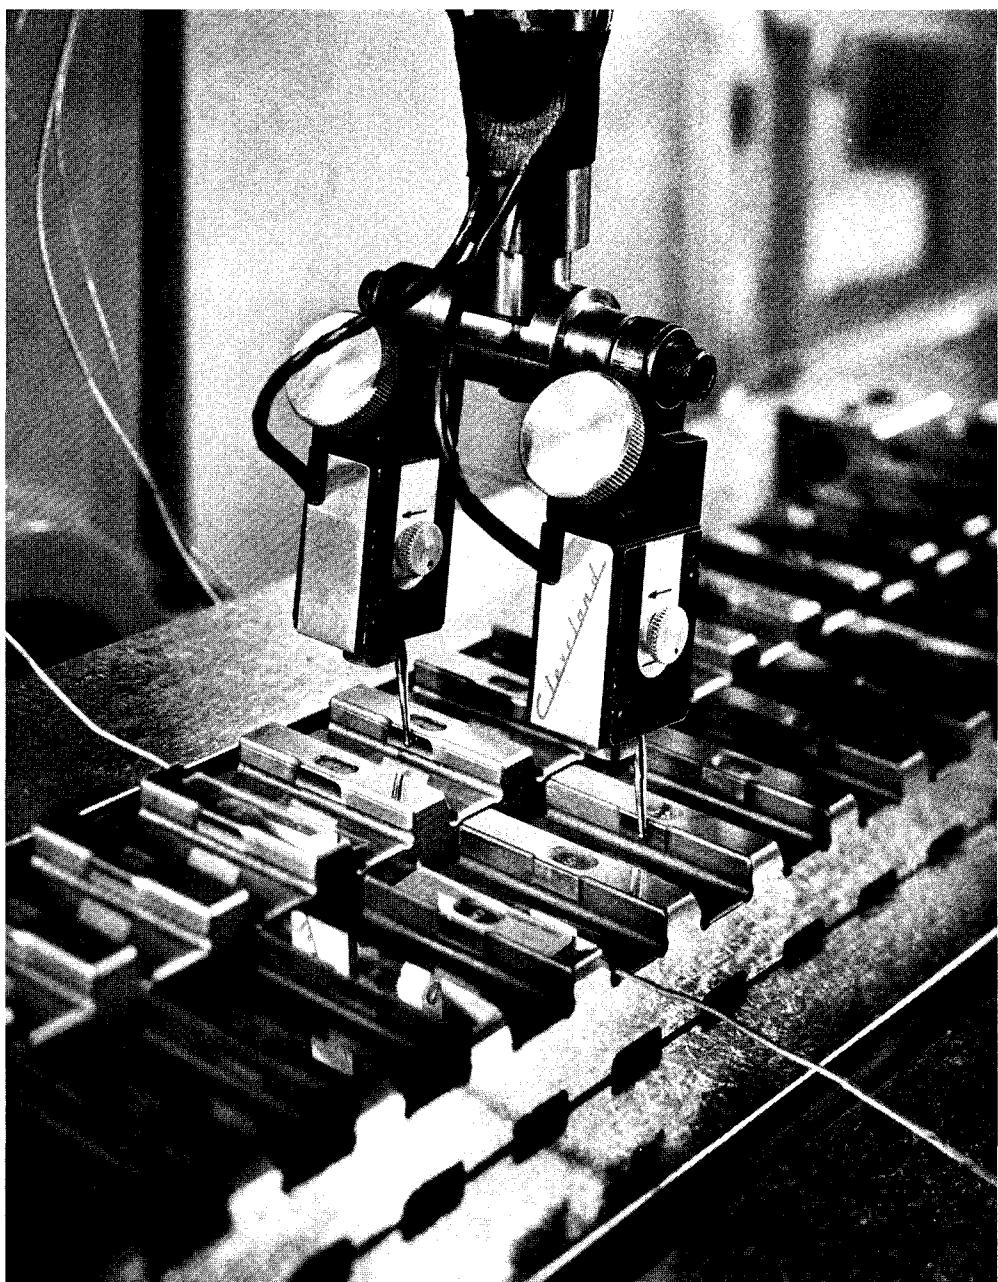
The design of the Step Gage enables 1 inch [30 mm in metric] "steps" to be contained in a single bar. Because it is an "end-measure," great accuracy can be achieved.
